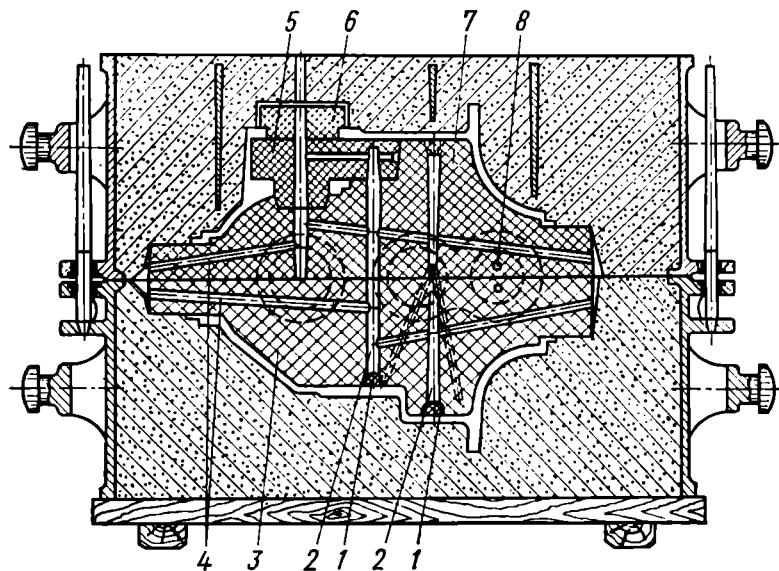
Layout of the vents in cores and in the mold for an iron casting
